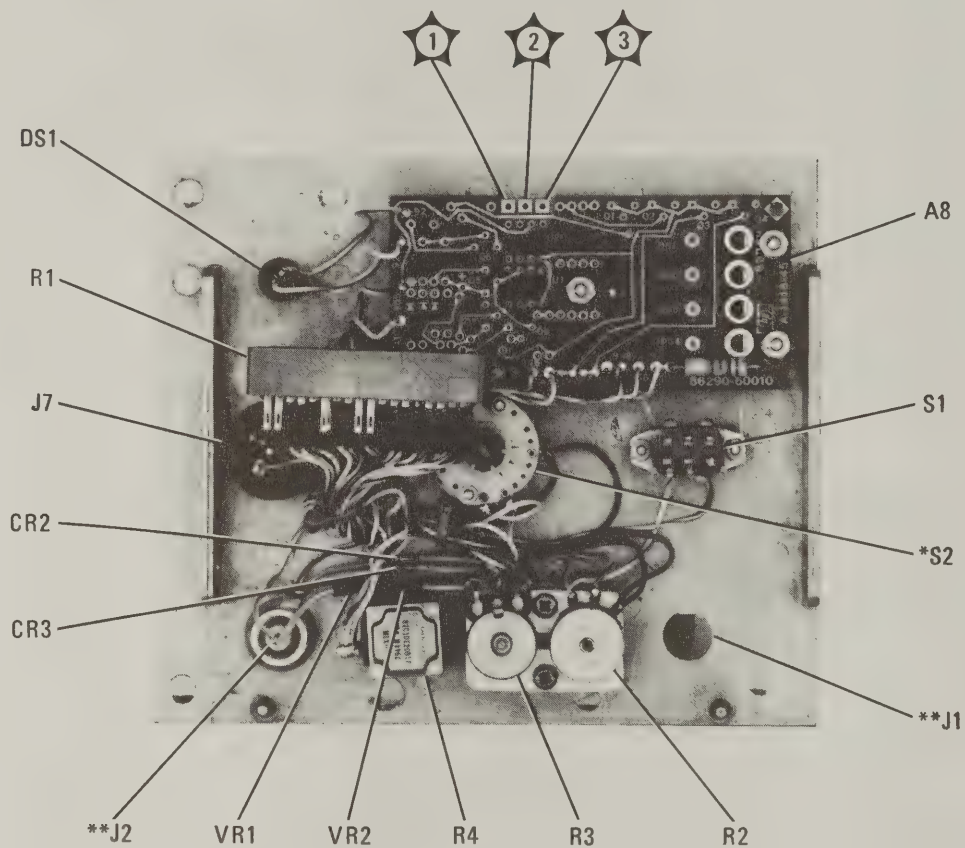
A8 Lamp Driver Assembly and Front Panel Schematic
